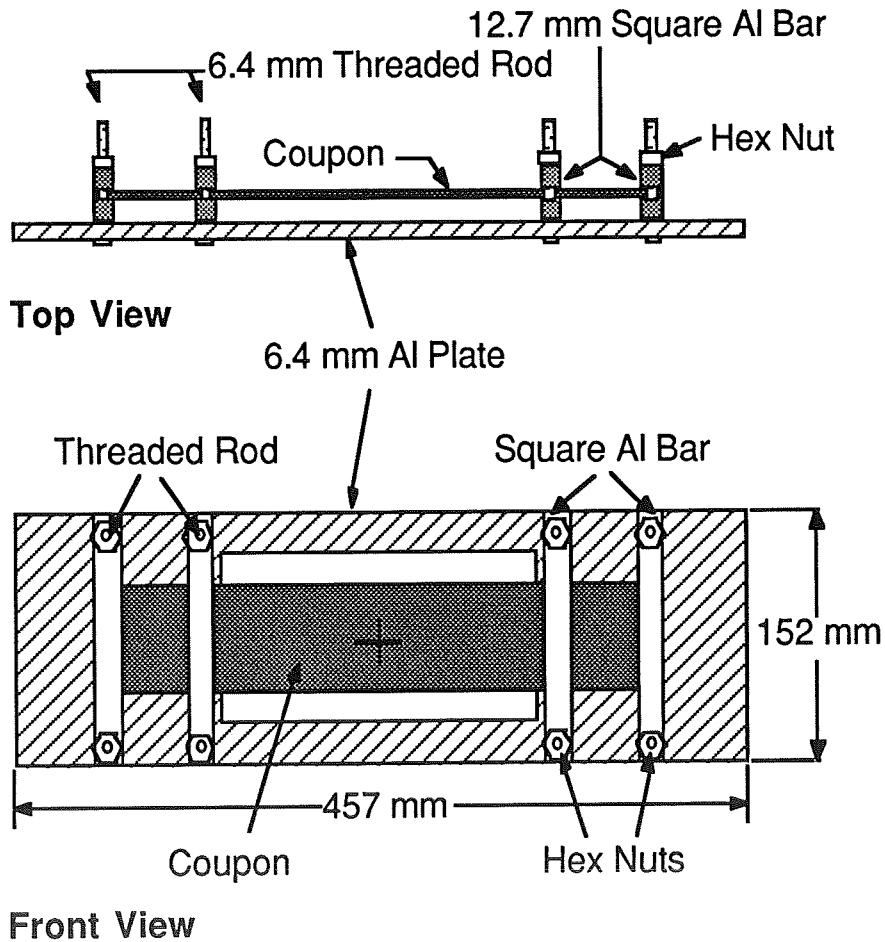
Illustration of Coupon Holding Jig for Impact Tests.
